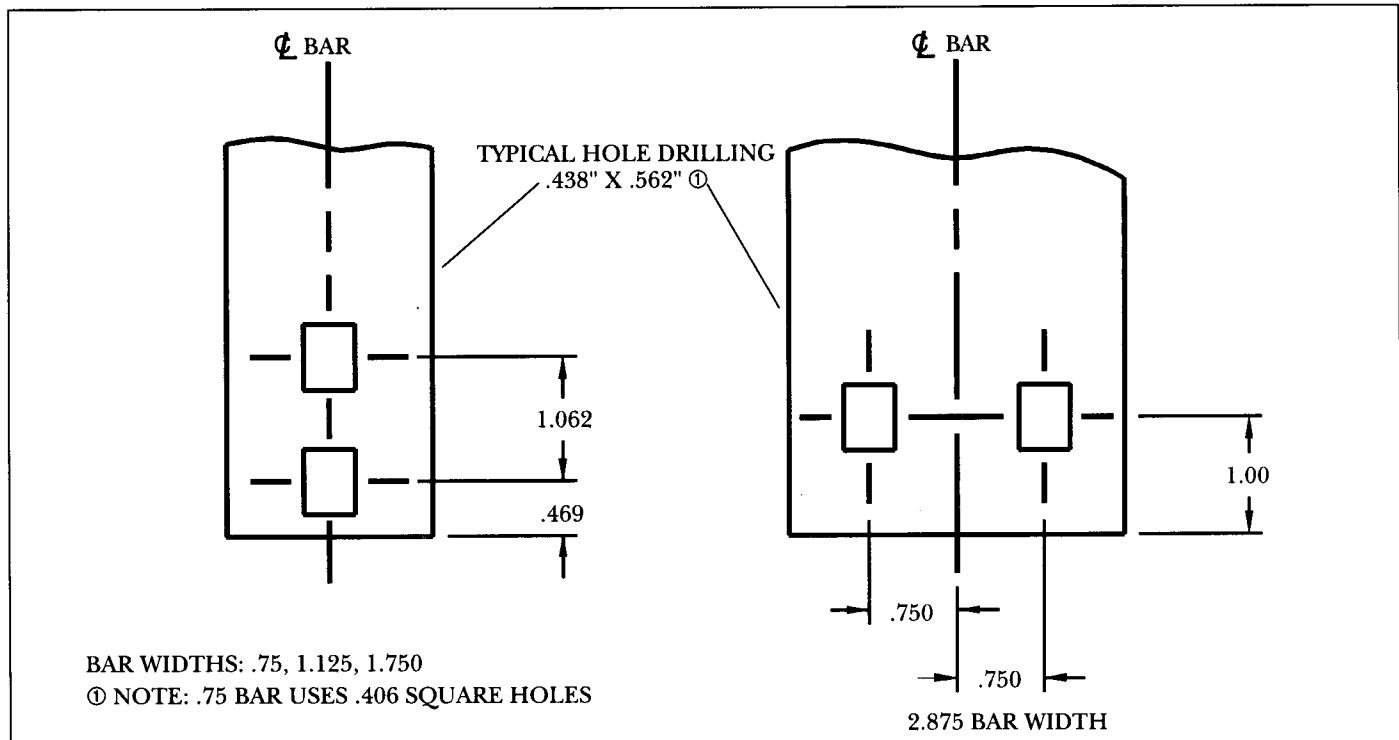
Flanged End Bus Bar Hole Pattern
